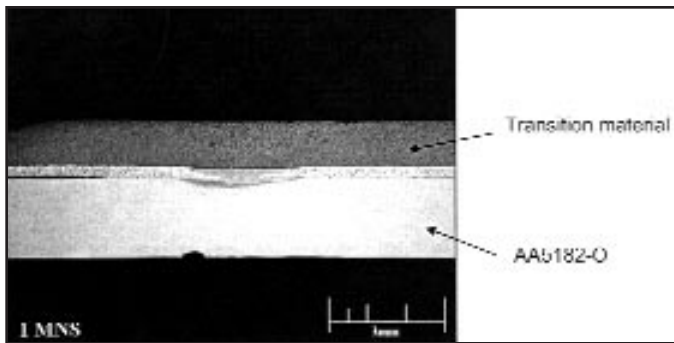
Weld cross section at 4 cycles weld time: no melting observed. The steel sheet separated from the transition sheet due to short weld time.
